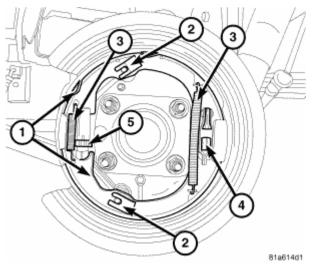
Identifying Brake Shoes Courtesy of CHRYSLER LLC
